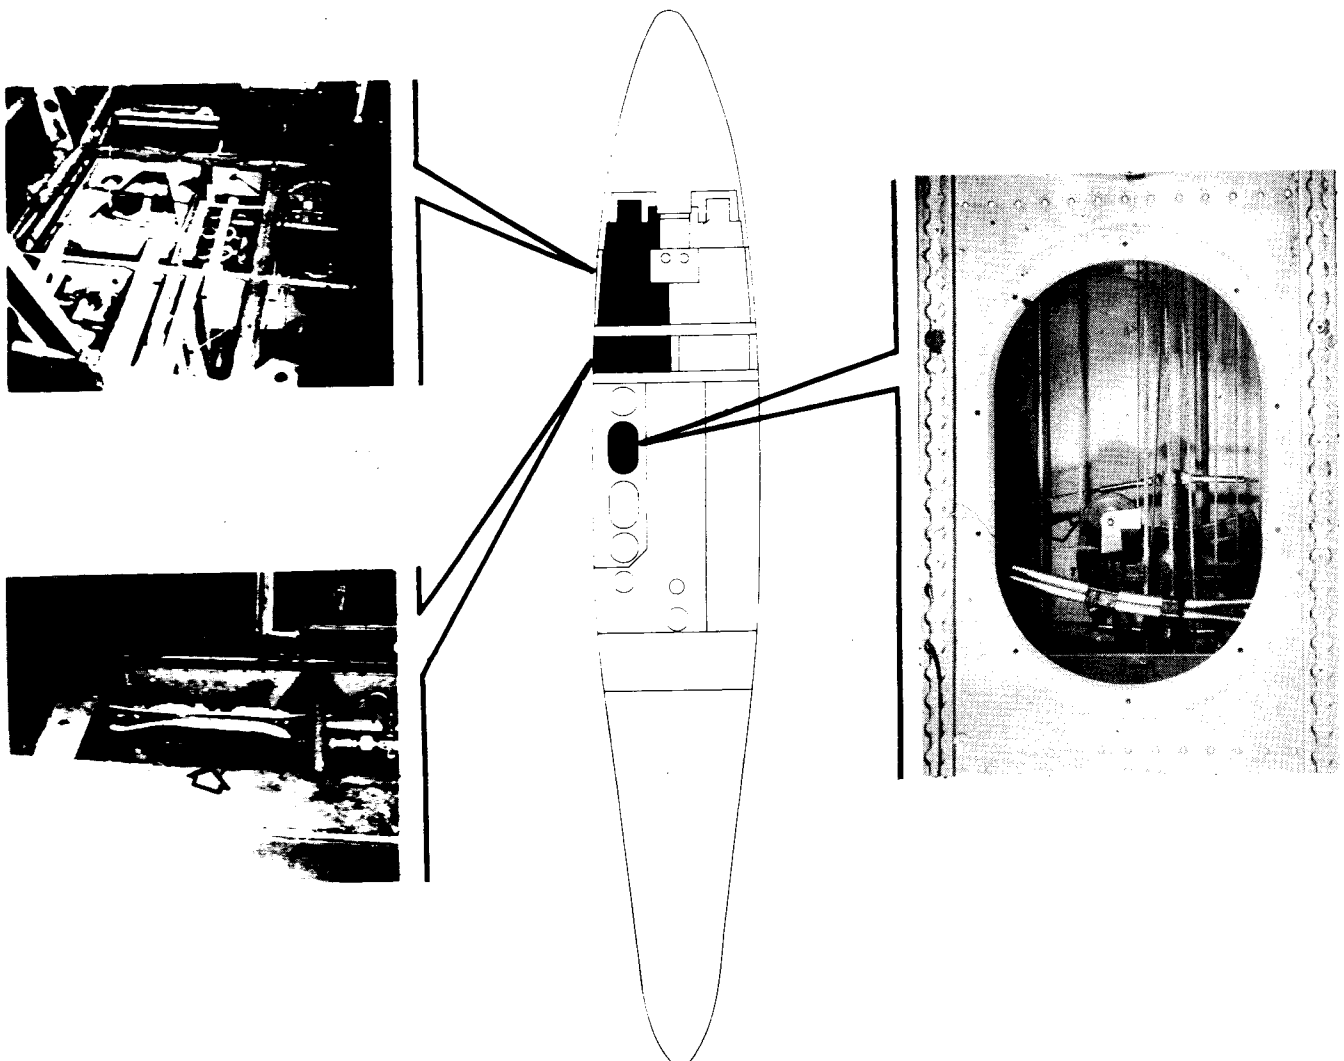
Aileron Tab Control Cables (Wheel Well to Tab Control)
